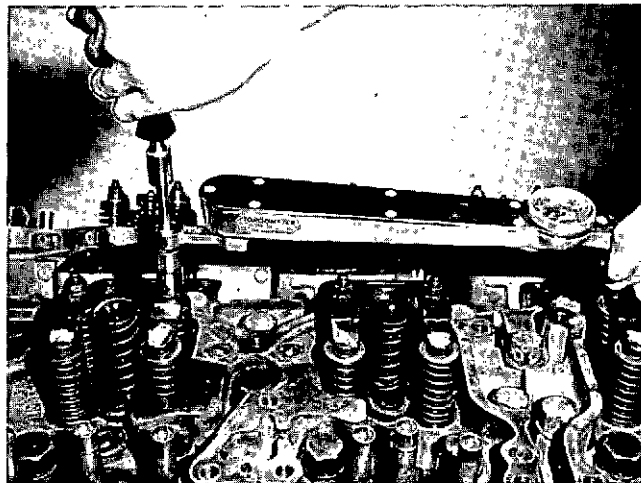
, V414197. Tightening crosshead locknut with ST-669 and torque wrench
